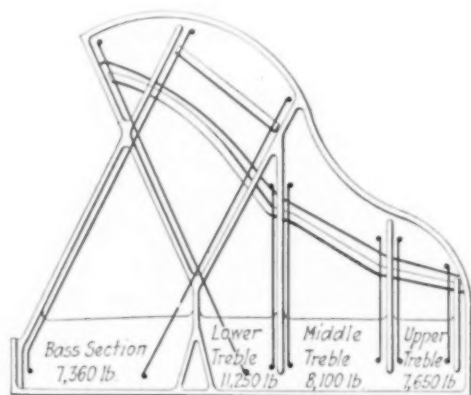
STRING PLAN AND IRON FRAME OF A GRAND PIANO
